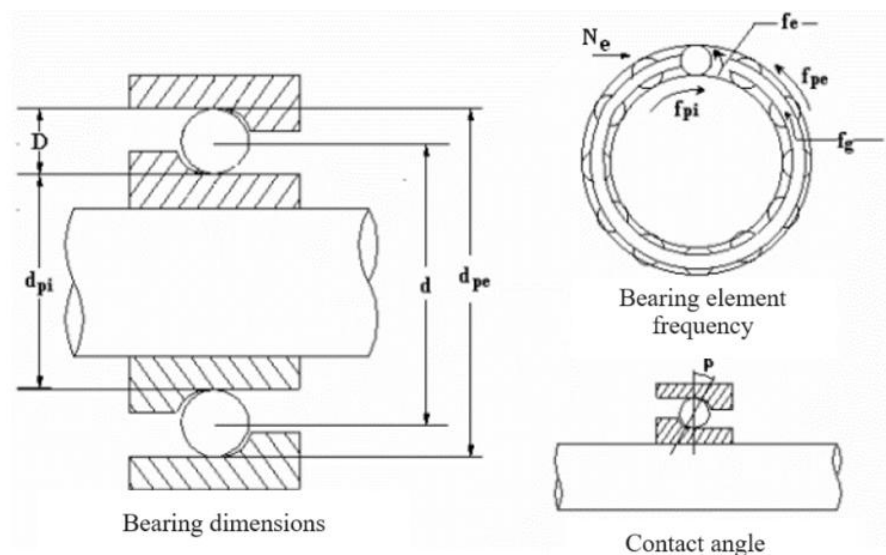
Frequencies, dimensions, contact angle of a bearing.
